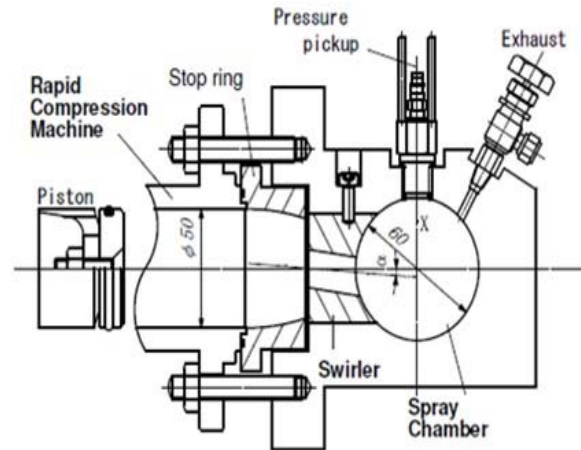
Cross section of spray chamber with swirler inserted between rapid compression machine and spray chamber.
